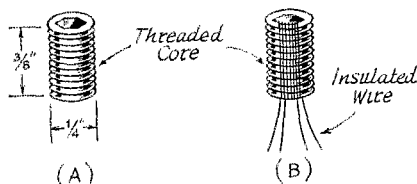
(A) Threaded core as removed from slug-tuned coil. (B) Miniature core with bifilar-wound coils.
